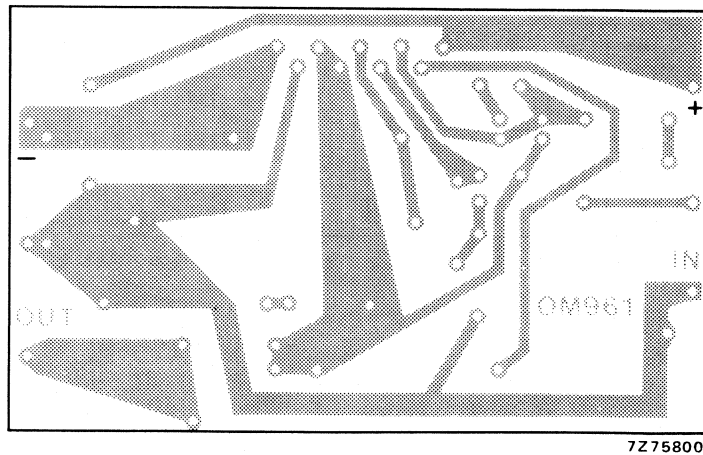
Component side of DIL-version; for component layout see Fig. 6.
